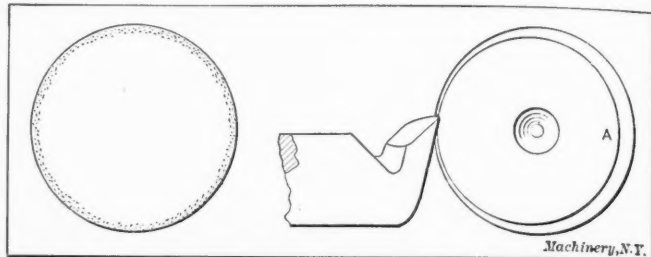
Tool Steel should be centered Concentric, in order to remove the Decarbonized Outer Surface
